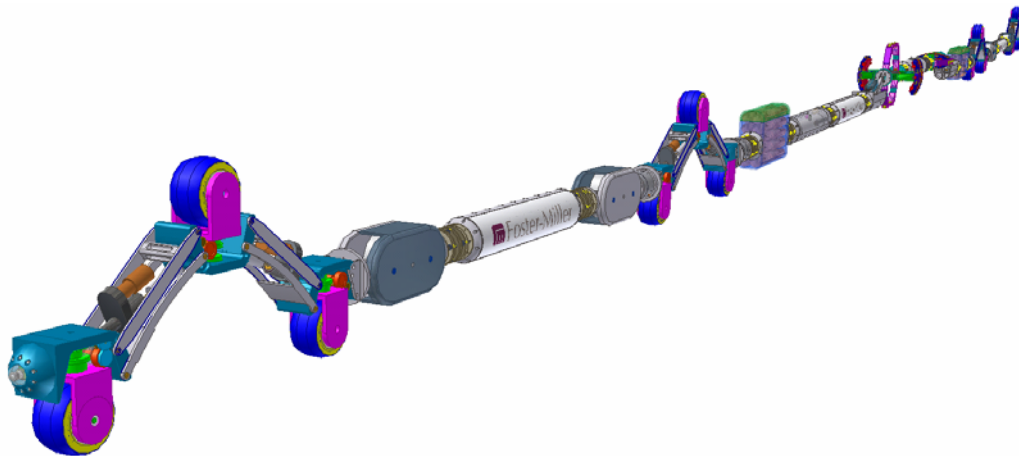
RoboScan Inspection Robot for unpiggable pipelines
